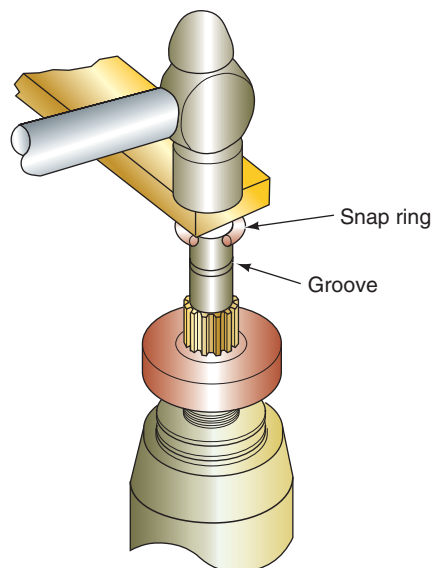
Once the snap ring is centered on the shaft, a hammer and block of wood can be used to install the ring onto the shaft.
